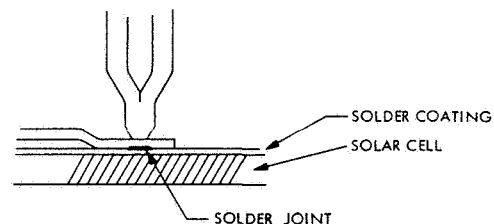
Single-point Soldering (Ref. 10.4-3)
